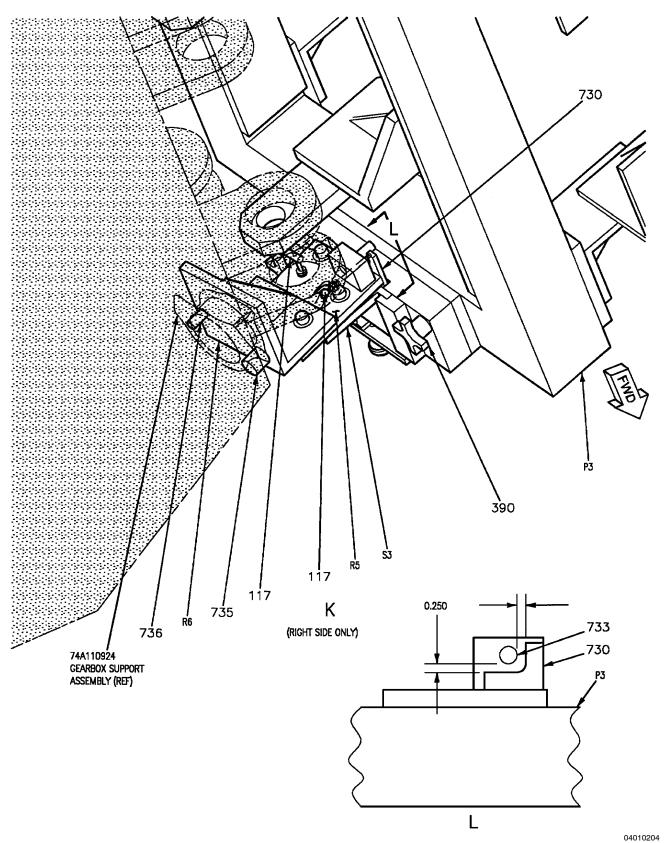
Inspection of Inner Wing Contour (Sheet 4)
